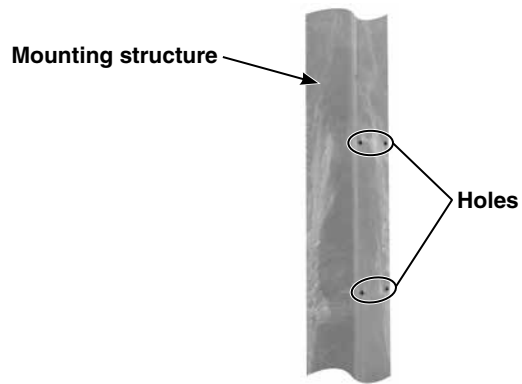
Drill four holes in the structure where the control cabinet will be mounted.
